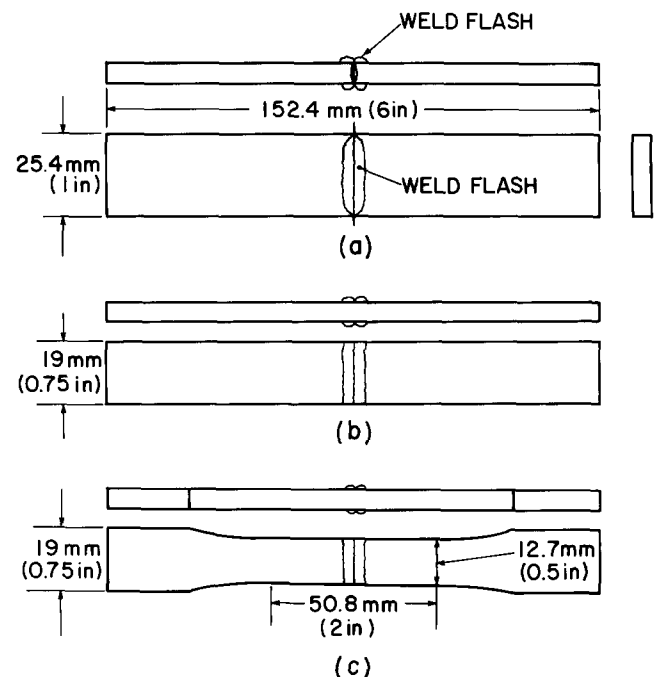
Specimen geometry for determining the strength of butt welds; (a), (b), (c), see text
